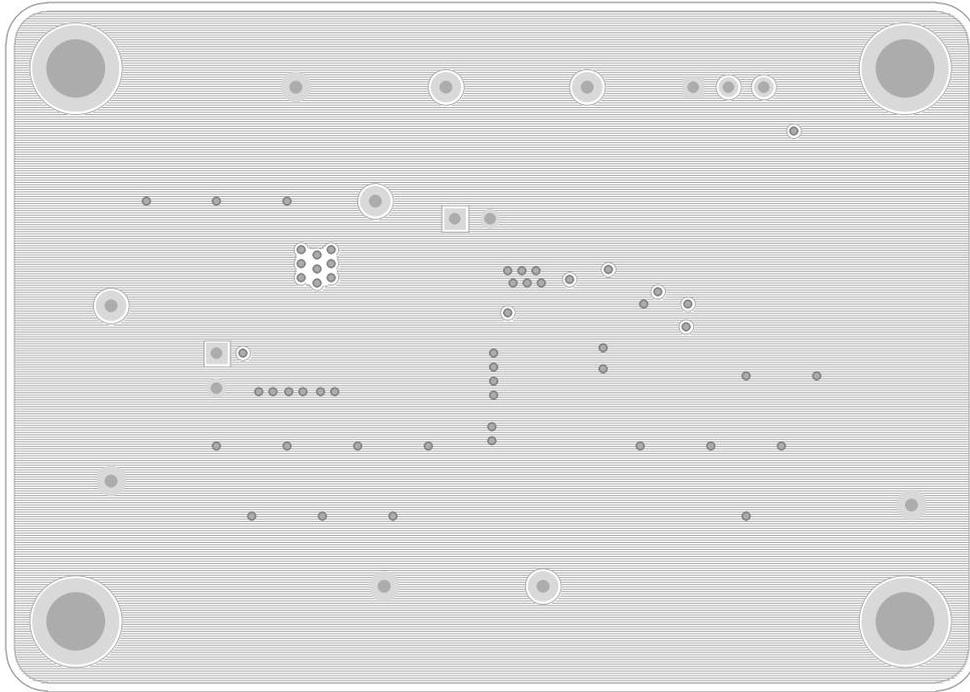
PCB Layout—Inner Side (3<sup>rd</sup> Layer)
